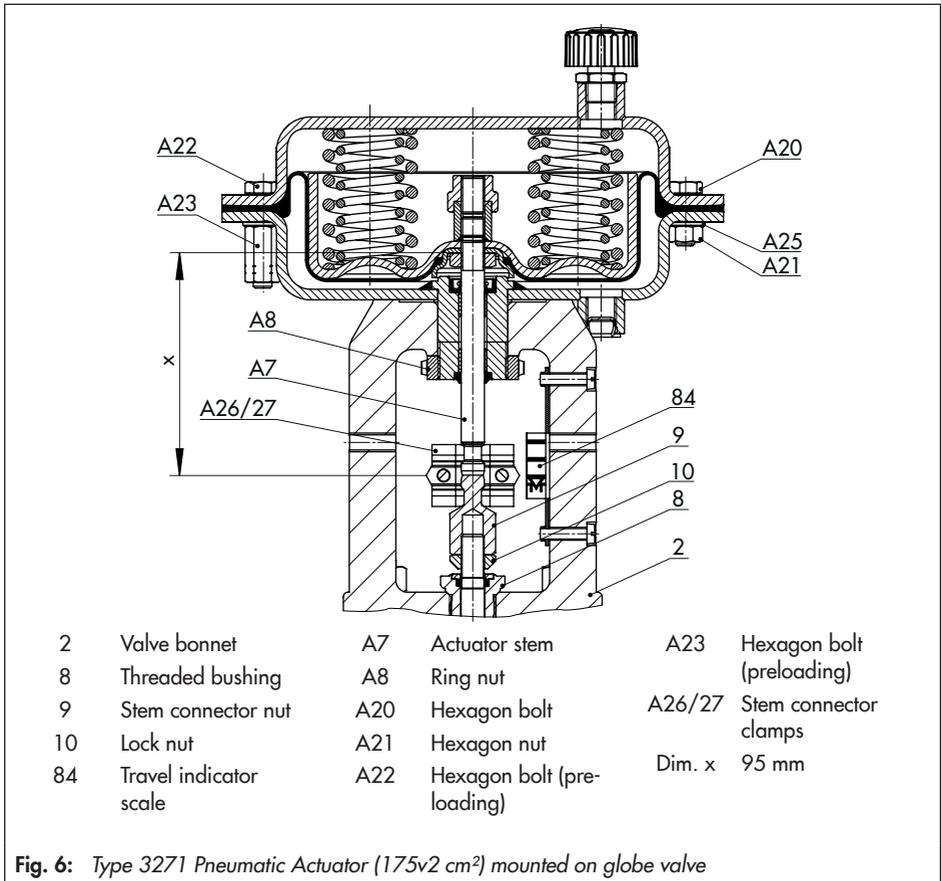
Type 3271 Pneumatic Actuator (175v2 cm<sup>2</sup>) mounted on globe valve
